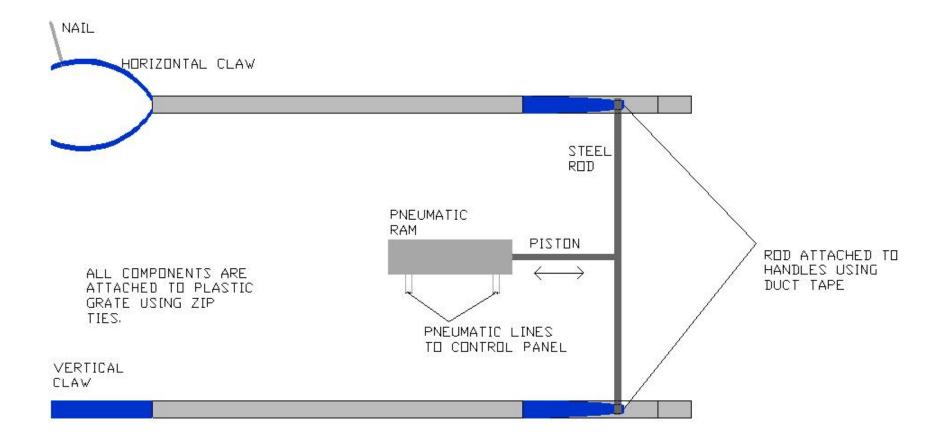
An overhead-view drawing of our pneumatic ram and claw system.
